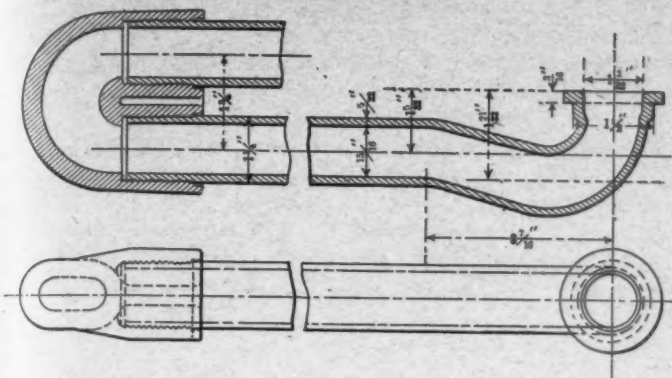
SUPERHEATER TUBES, SHOWING UPSET END AND CONNECTION TO RETURN BEND.
